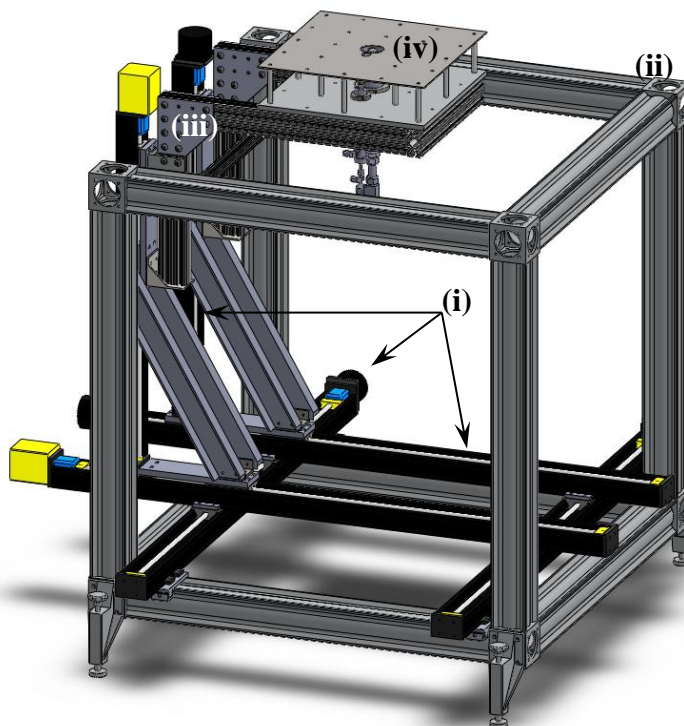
Layout of the three-dimensional traverse and supporting structure. The following components are labeled: (i) traverse components, (ii) optical railing for supporting the PDI transmitter and receiver, (iii) burner assembly support structure, and (iv) burner assembly.
